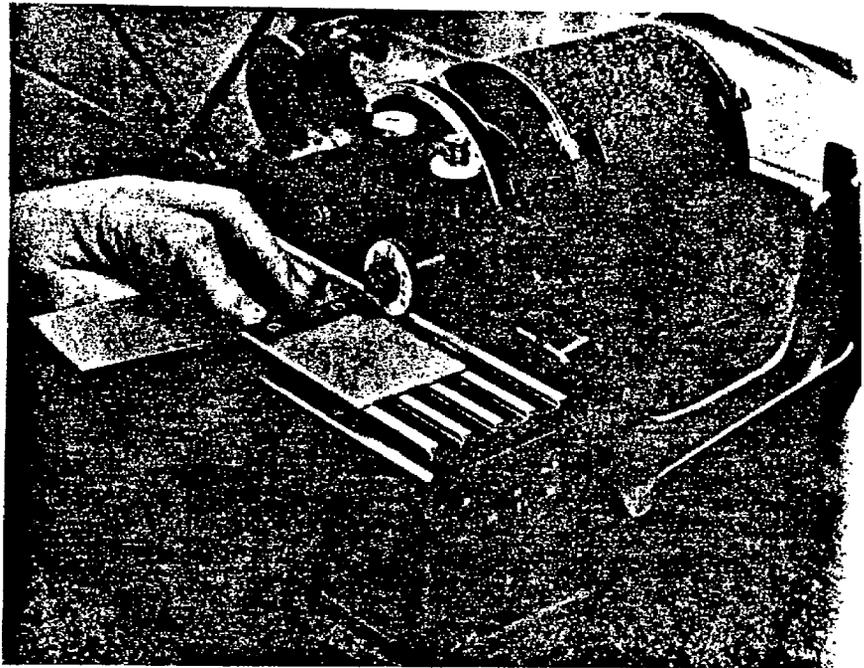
Abrasive wheel stripper (Carpenter Manufacturing Co.).
